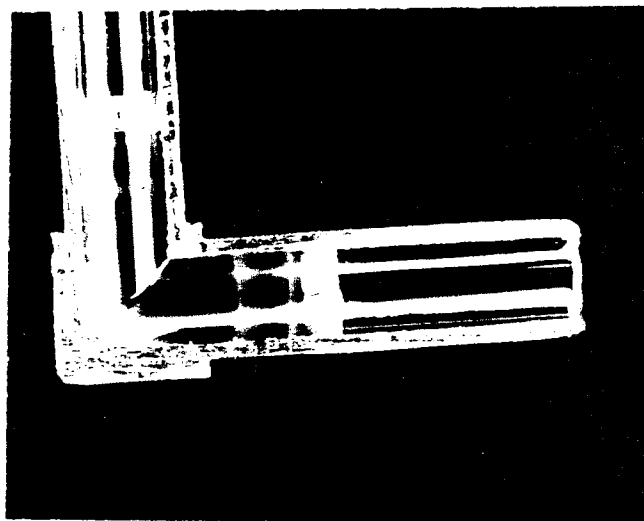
Cross-section of a weldment with visible discoloration due to Mn deposition in the heat-affected-zone (HAZ)
